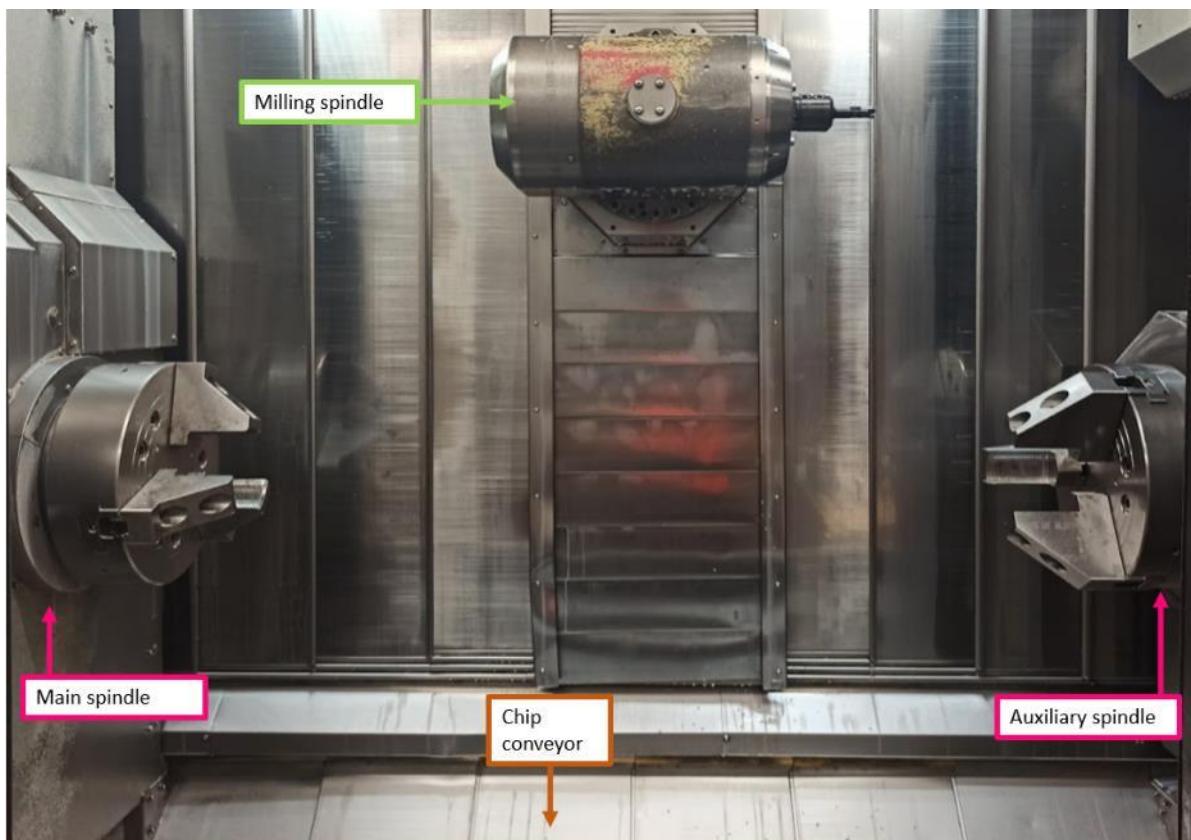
Interior of NT 4250 DCG Turn & Mill CNC machine at Metso.
